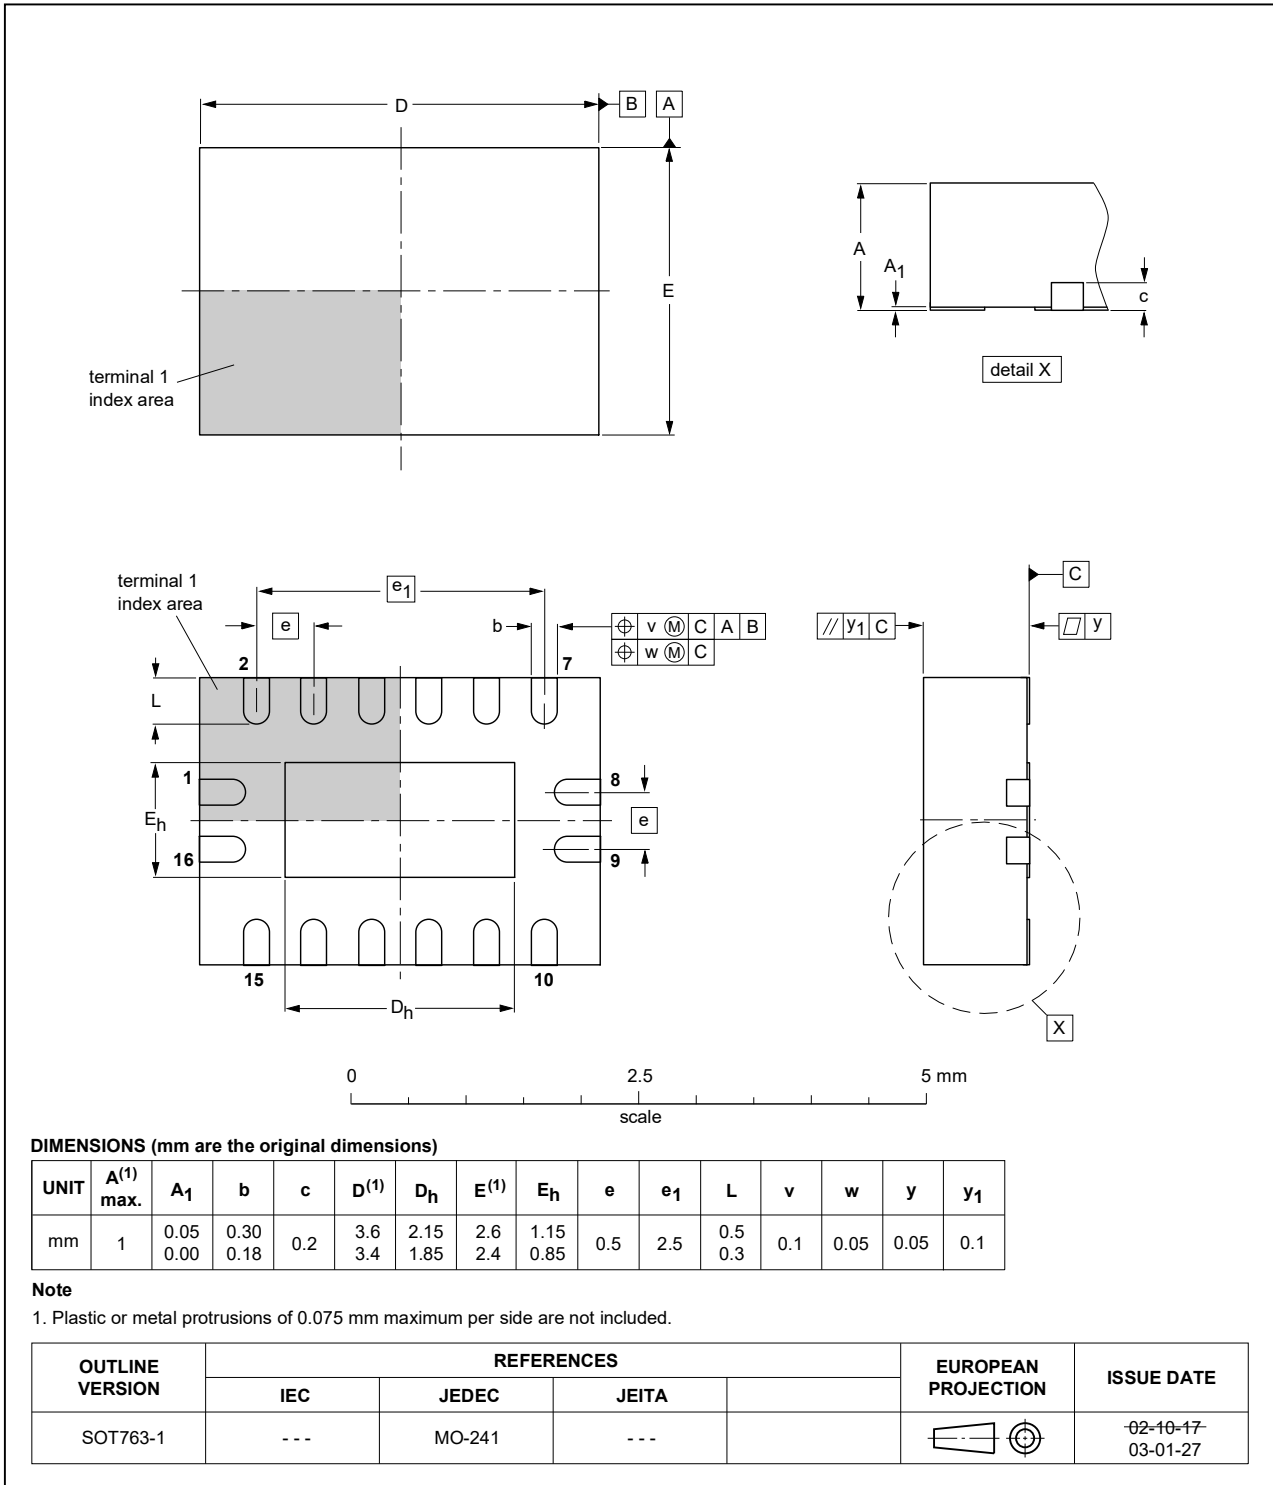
Package outline SOT763-1 (DHVQFN16)
